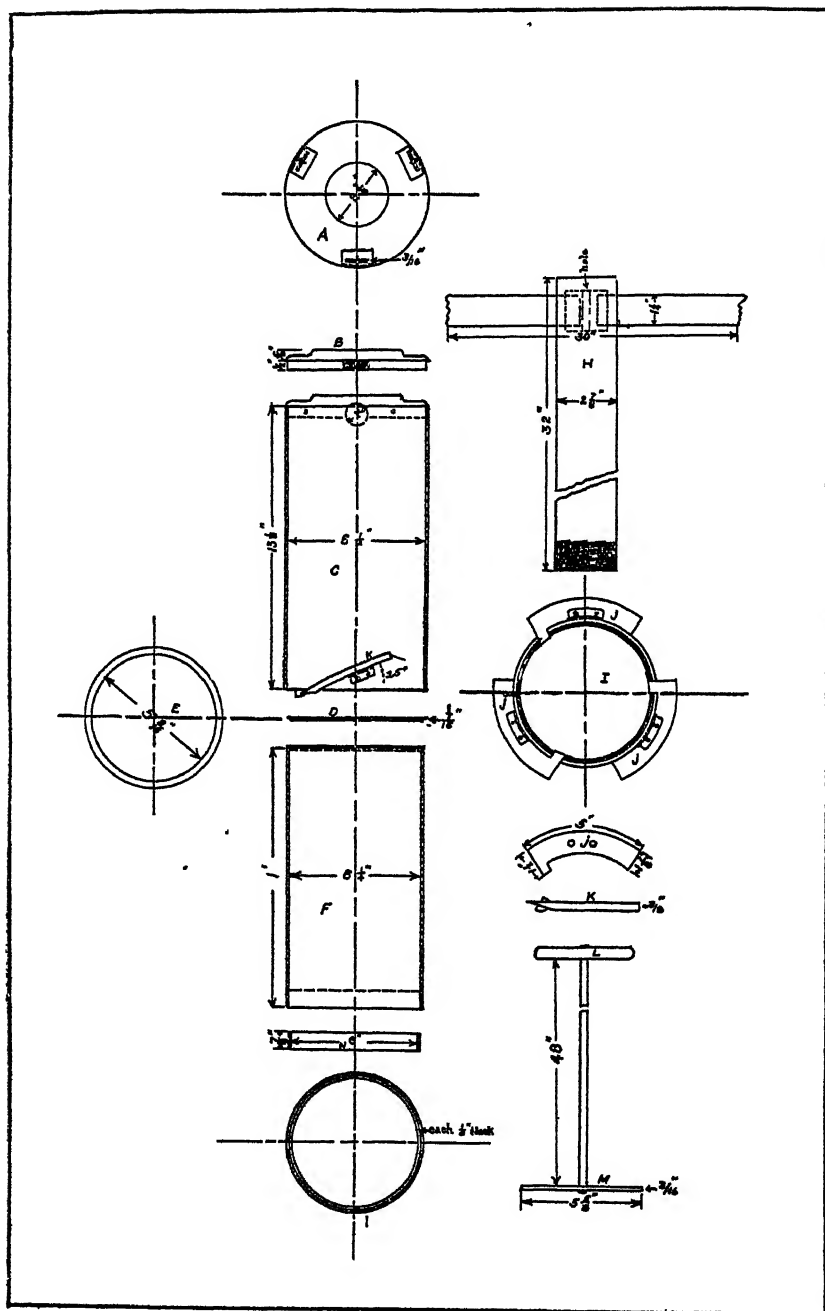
PLAN OF THE NEW SOIL CORE SAMPLER
